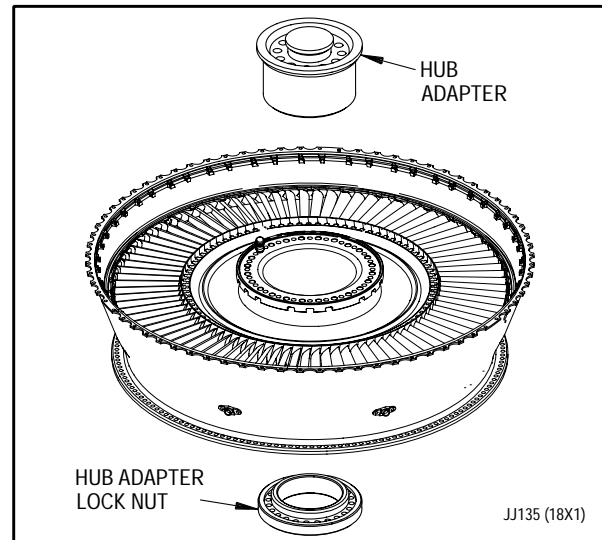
Fourth Stage Turbine Disk, Blades and Air Seal - Installation (Sheet 2 of 7)
